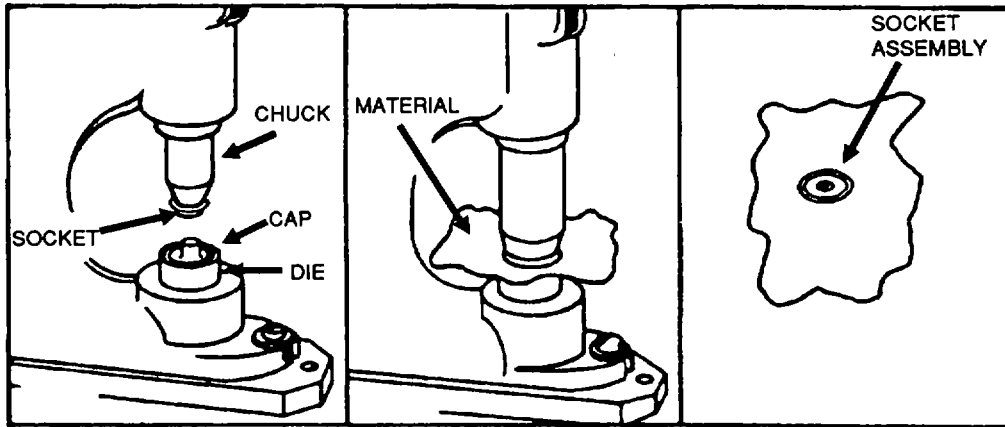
A. Seating A Snap Fastener Typical (Socket Assembly).
